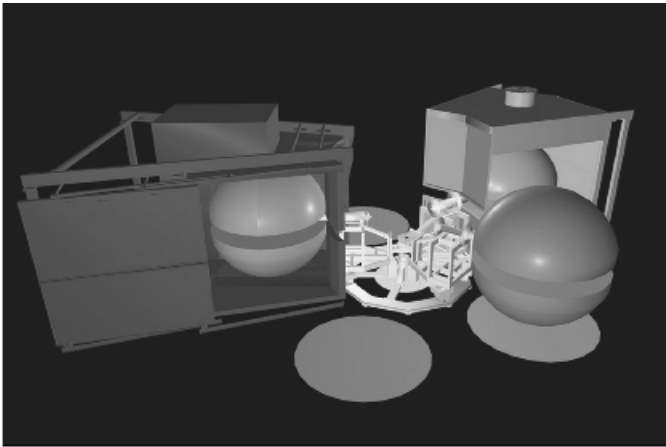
Four-arm turret machine showing the oven (1), cooler A (2), cooler B (3), and servicing (4) stations. (Courtesy of Ferry Industries, Inc.)
